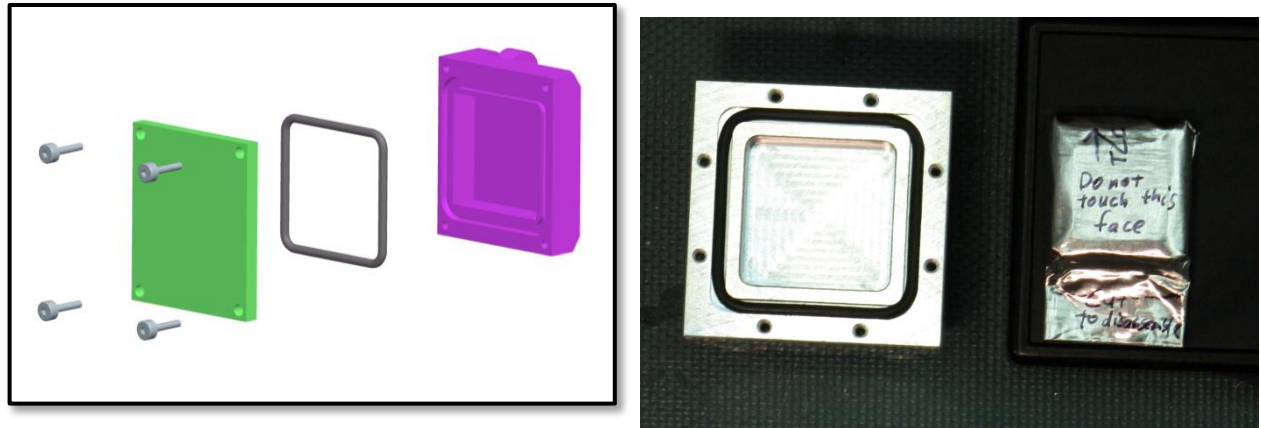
Left: Computer model of the sensor holder. Right: Wrapped sensor shown before insertion into a holder.
